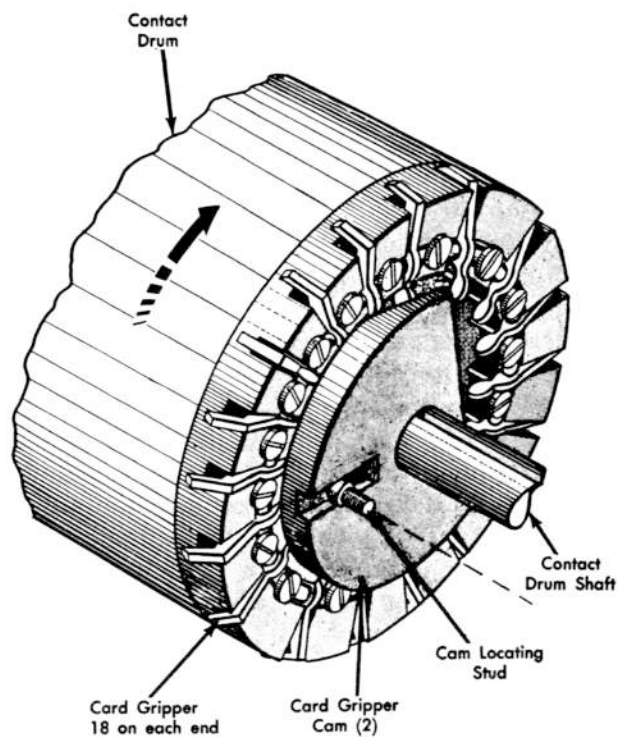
CONTACT DRUM AND GRIPPER FINGERS
